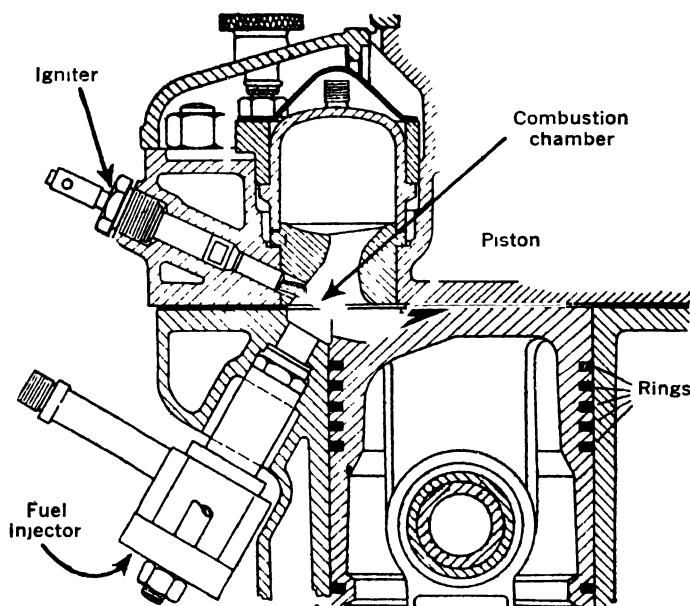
Details of Combustion-Chamber of Saurer-Diesel Automotive Engine.
